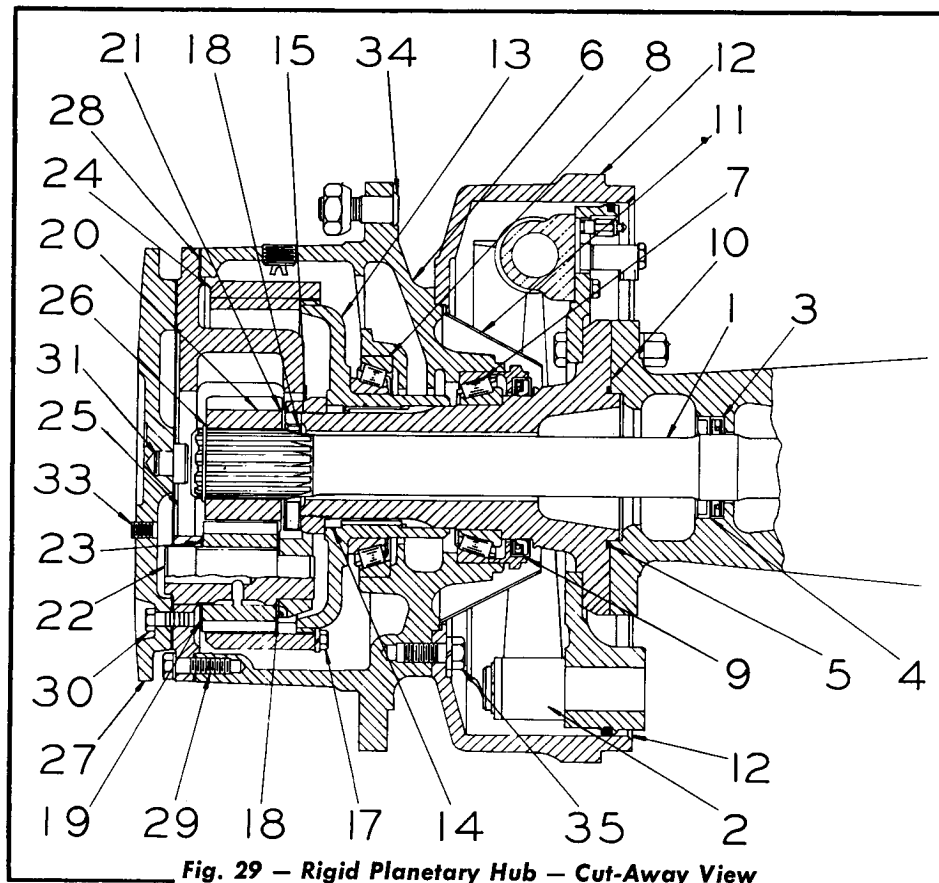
Rigid Planetary Hub - Cut-Away View
